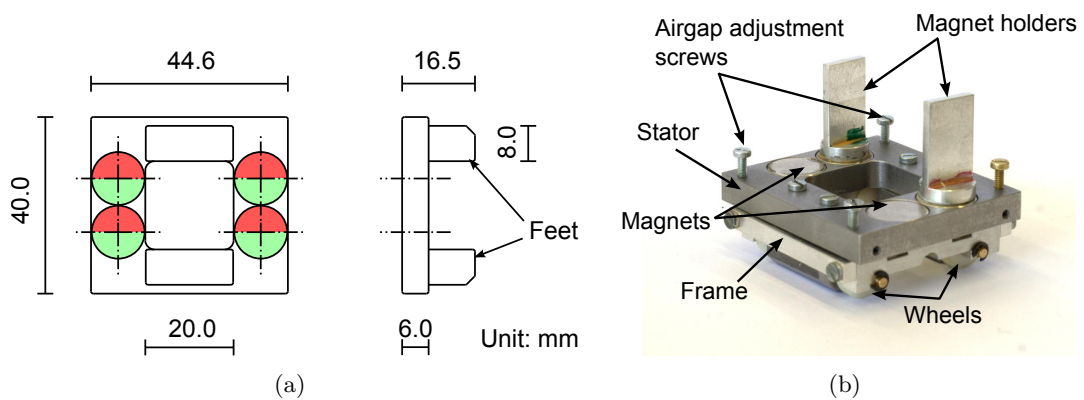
(a) MSDI2 drawings, showing the exchangeable feet, and (b) picture with the supporting wheels and the screws to adjust the air gap.
